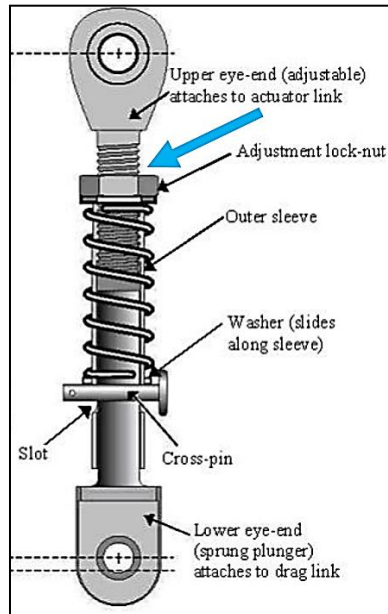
Schematic of a Down Lock Link assembly (blue arrow indicating location of failure at the threaded area). (Source: Metallurgy report)
